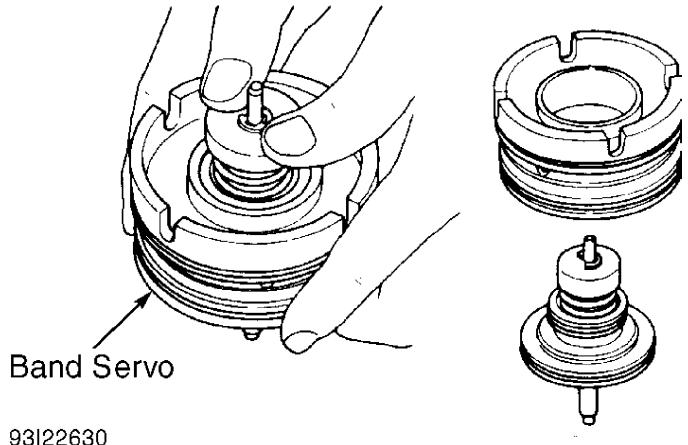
Disassembling Band Servo Piston Courtesy of Nissan Motor Co., U.S.A.
